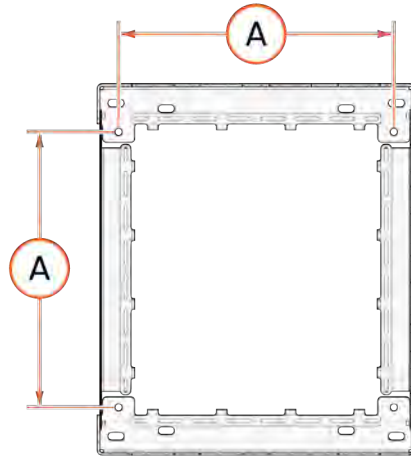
Liquid Cooled Satellite footprint and fixing points (mm)
